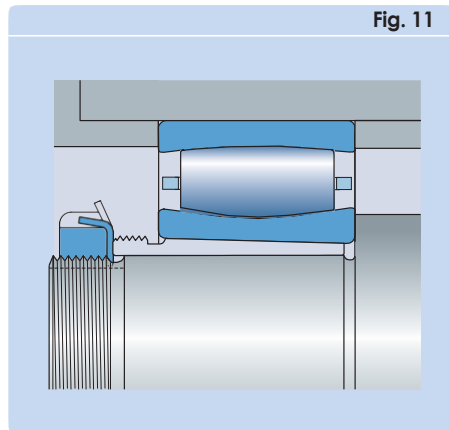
Inner ring on a withdrawal sleeve and a stepped shaft, axially located by a shaft nut
